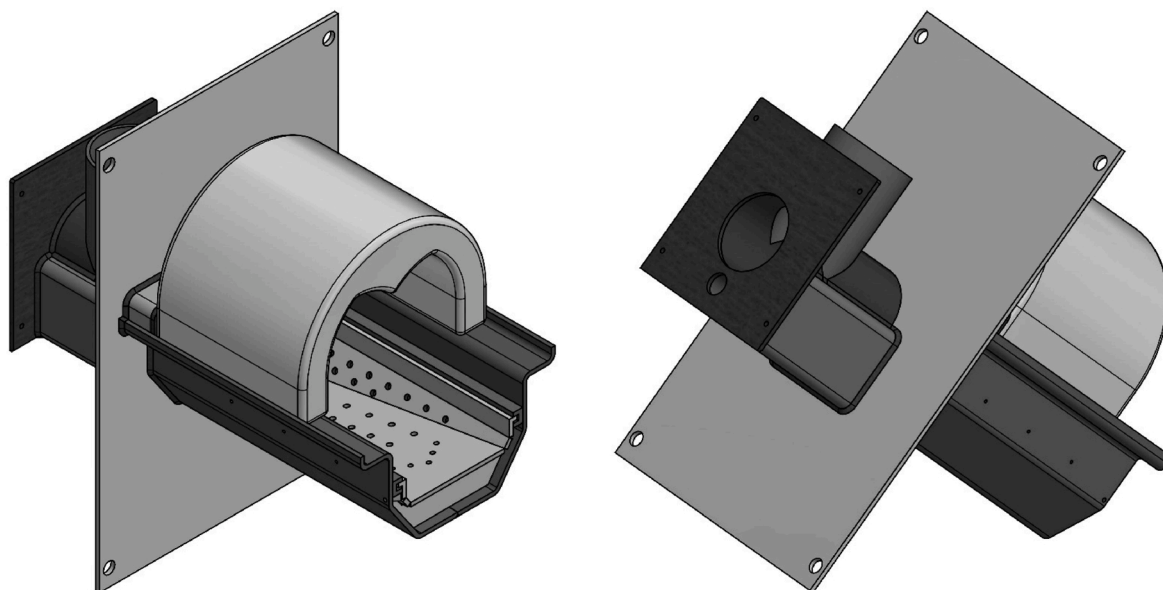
Prototype of the used gutter burner for combustion of pellets.
